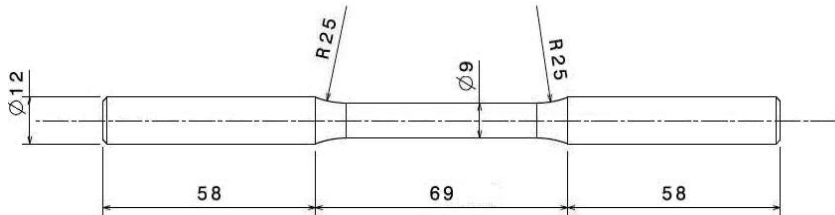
Rotary bending fatigue specimen (dimensions in mm)
